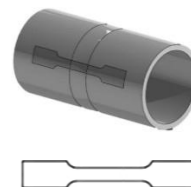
The configuration of the tensile specimen cut from the pipes welded.
